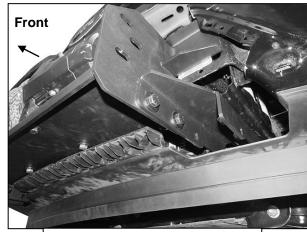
Attach driver/left Support Bracket to bottom of frame and inner nut plate
